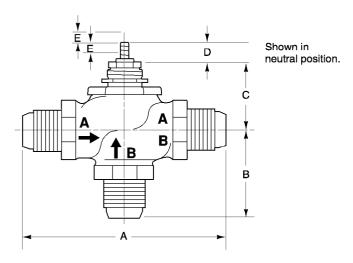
Dimensions for VB-7332 Series Valve Bodies.
